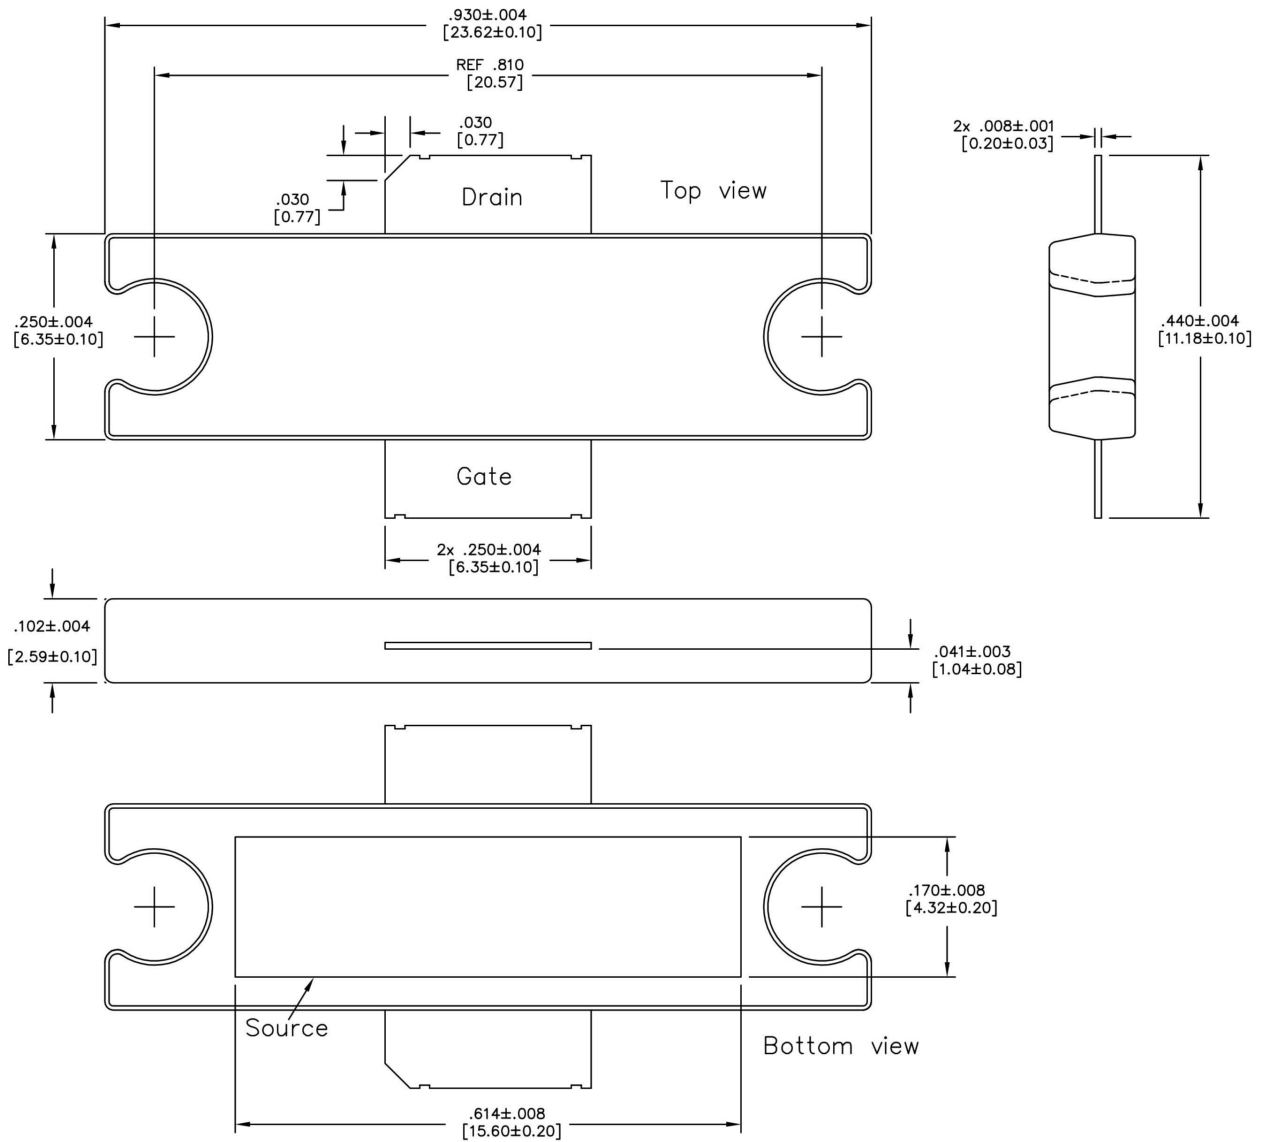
TO272-2 Bolt-Down Plastic Package Dimensions (all dimensions in inches [millimeters])
